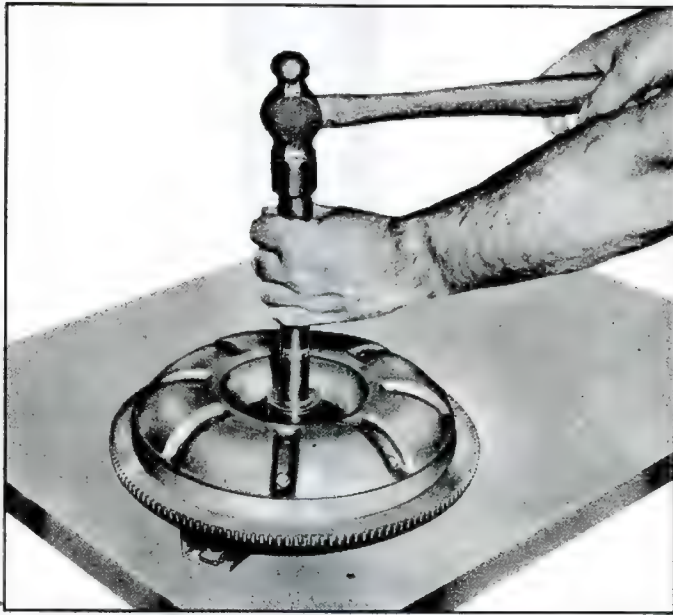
E-43—Installing Converter Hub Bushing with J-8360-1 and Handle J-7079-2
